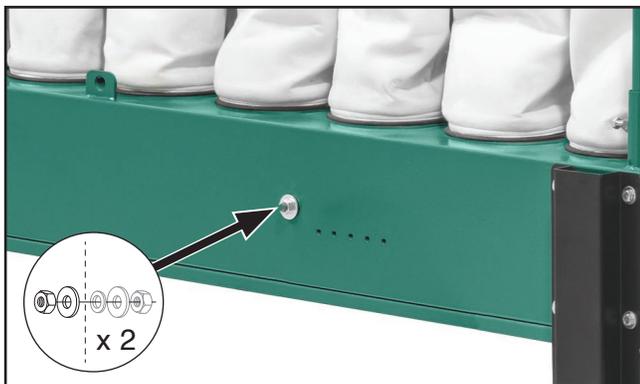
Location of outside chip deflector fasteners (rear machine body shown).
